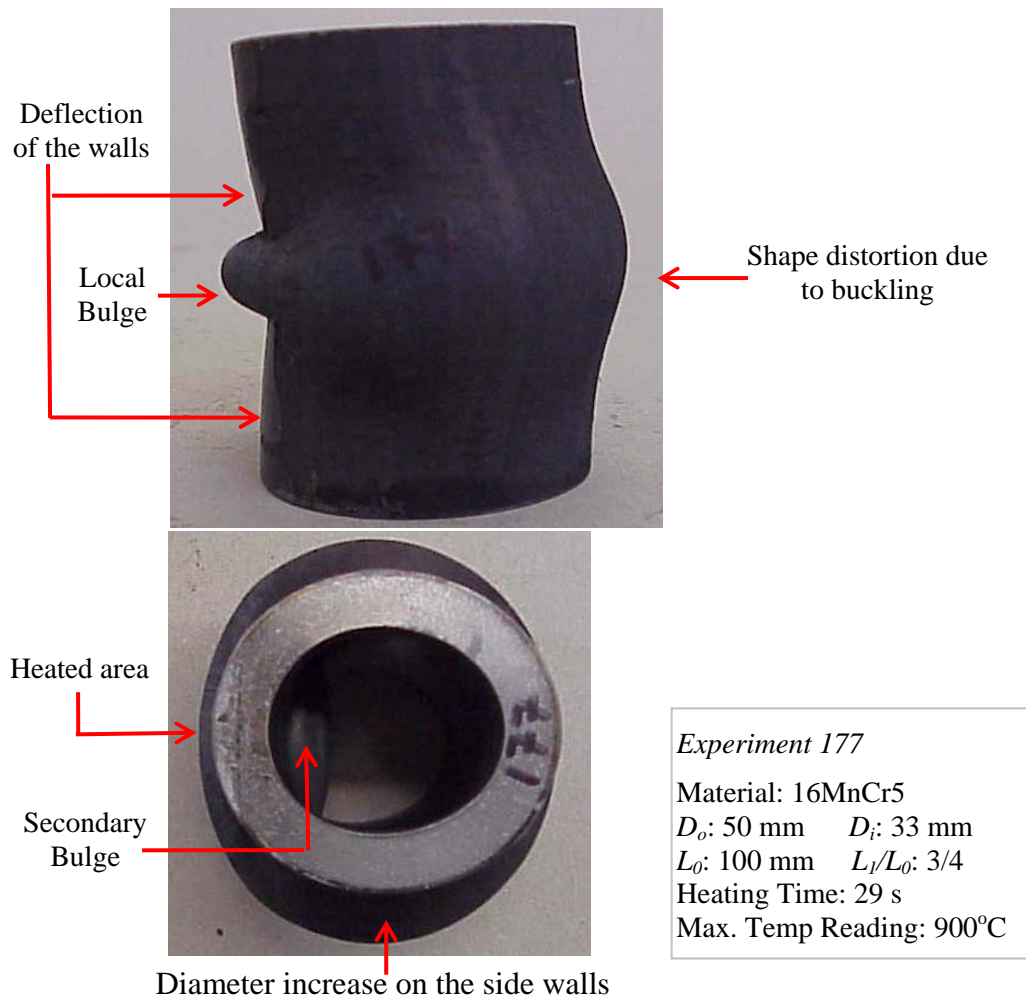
Local heating and free forming of workpieces with large diameters.
